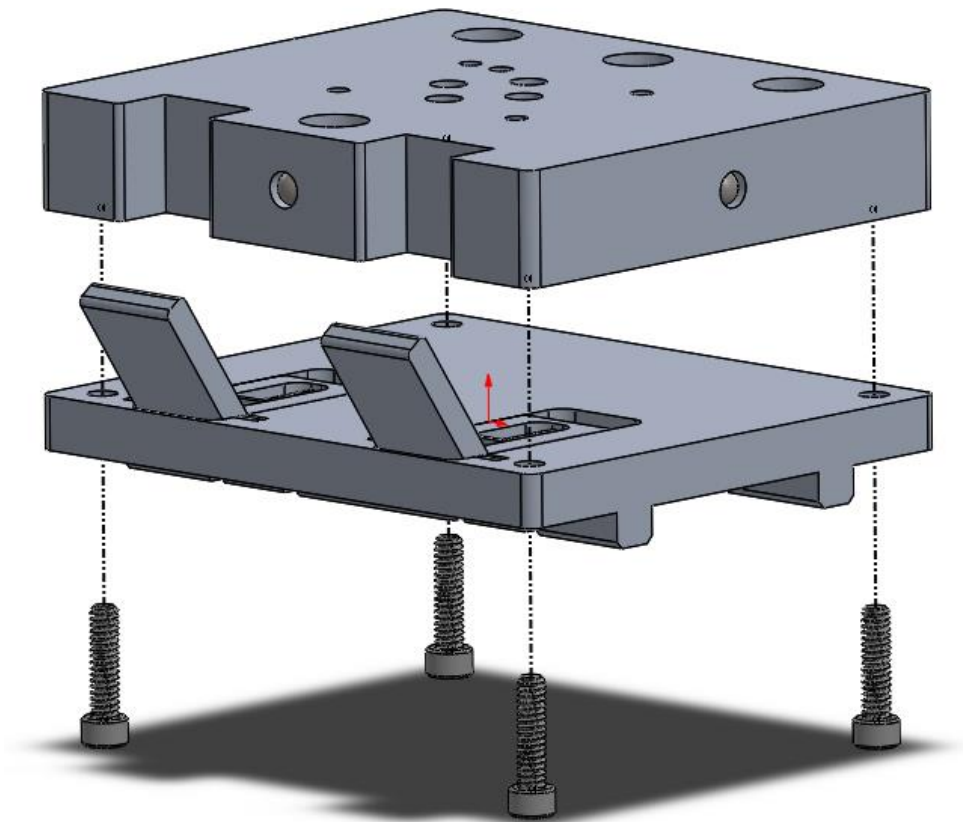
Shows how the sub-plate and mounting plate are fastened together.
